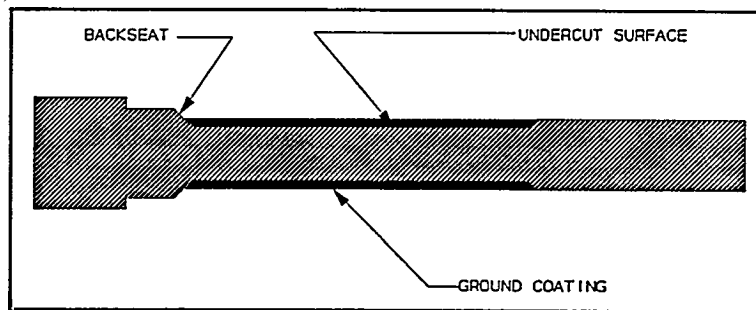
SPECIAL UNDERCUT DESIGN ON A VALVE STEM
